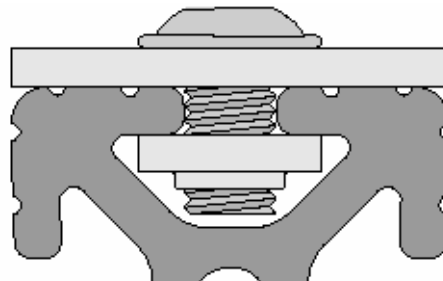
A side view of an 8020 piece showing how connections are made using machine screws and plates to hold everything together.
